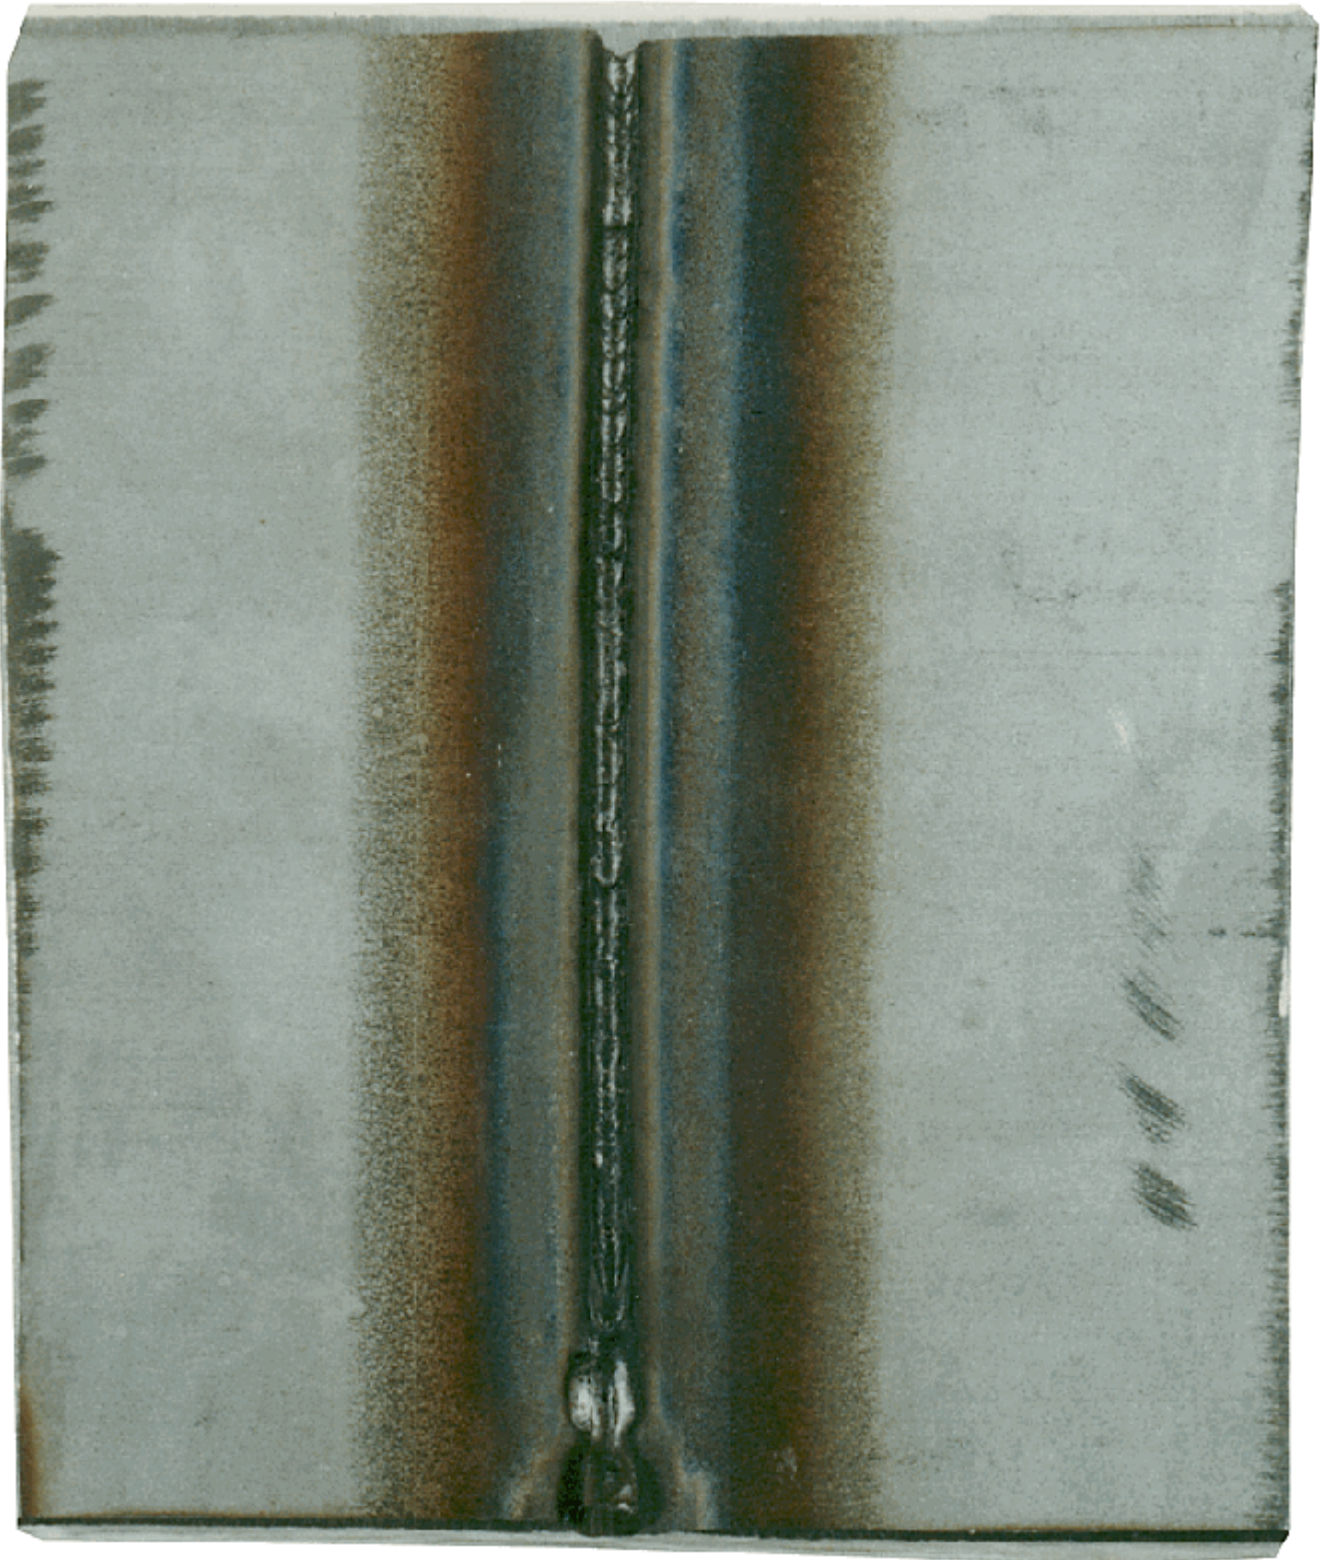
UNACCEPTABLE; EXTREMELY BAD RESULT; VERY HEAVY OXIDE LAYER PRESENT - THIS MAY DEVELOP WHEN WELDING WITH COATED ELECTRODES (SMAW) OR WITH TIG WELDING (GTAW) WITH SEVERE LACK OF BACK-PURGING
